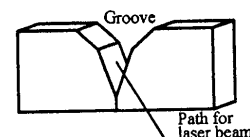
Example of a groove used in LPLAC high-speed welding of thick plates.
